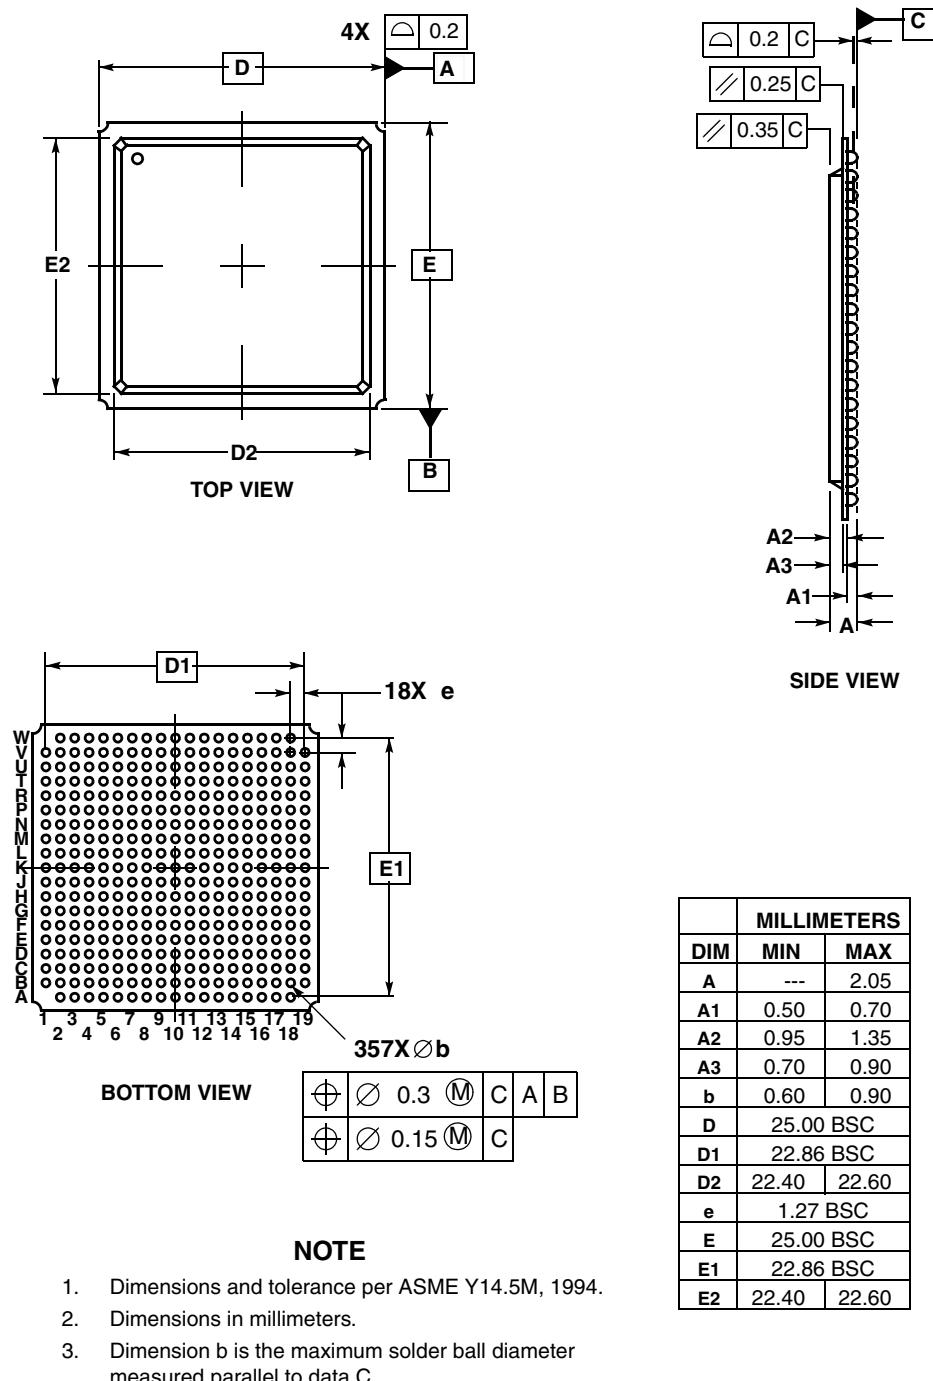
Mechanical Dimensions and Bottom Surface Nomenclature of the ZP PBGA Package
